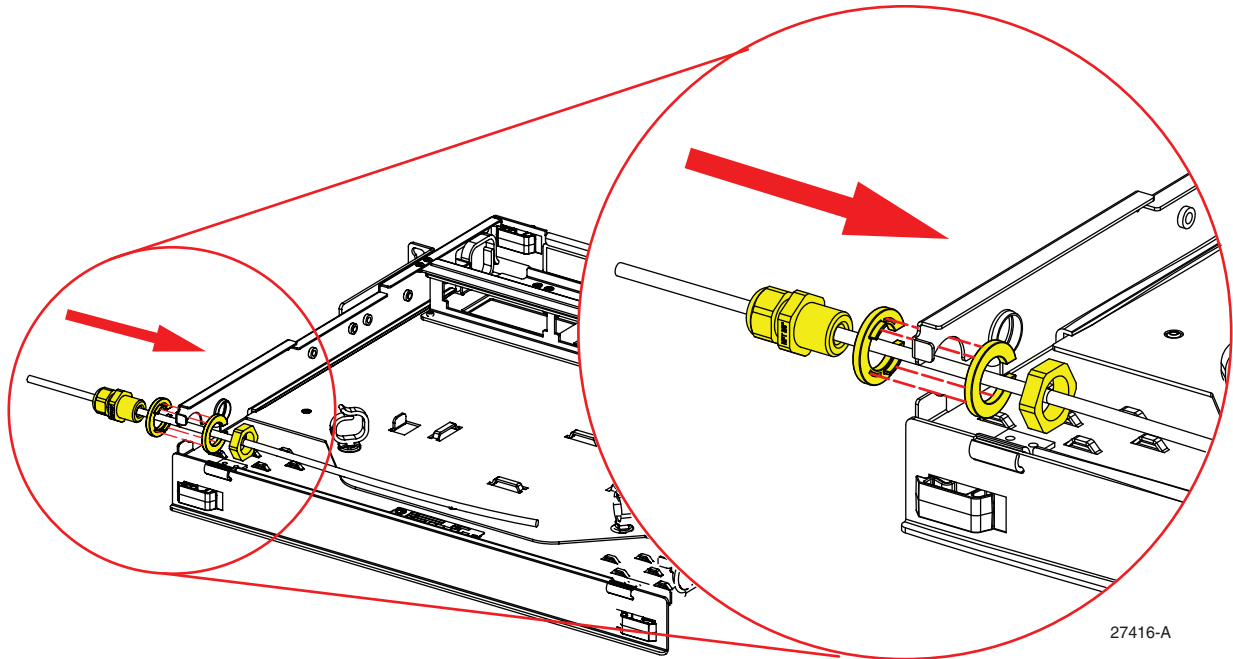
Installing 3/8-inch Cable Gland With Snap-Fit Washers (EPX 1U Panel Only)
